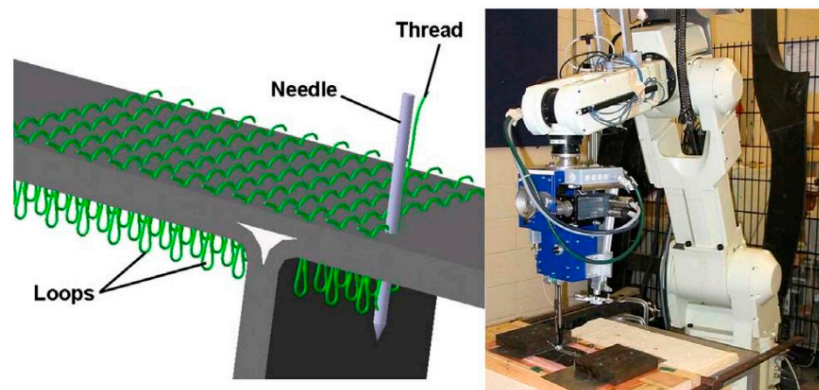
Schematic of tufting (left) alongside a six-axis Kawasaki robot arm fitted with a KSL KL150 tufting head operating at Cranfield (right) [79].
